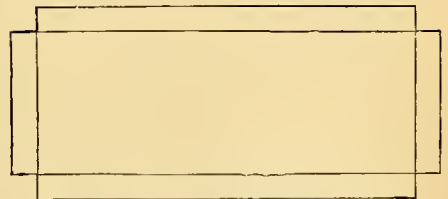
ZINC CUT TO FORM BOTTOM.
